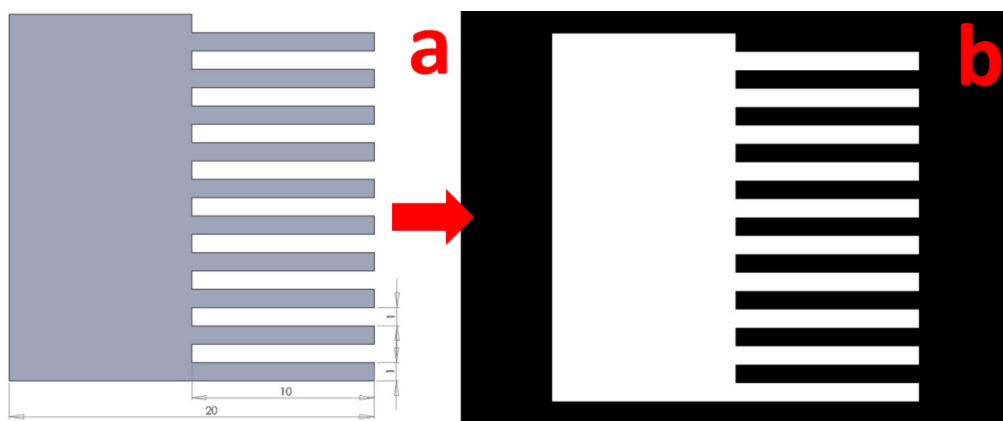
(a) CAD image (dimensions in mm) and (b) png of single layer for comb device
